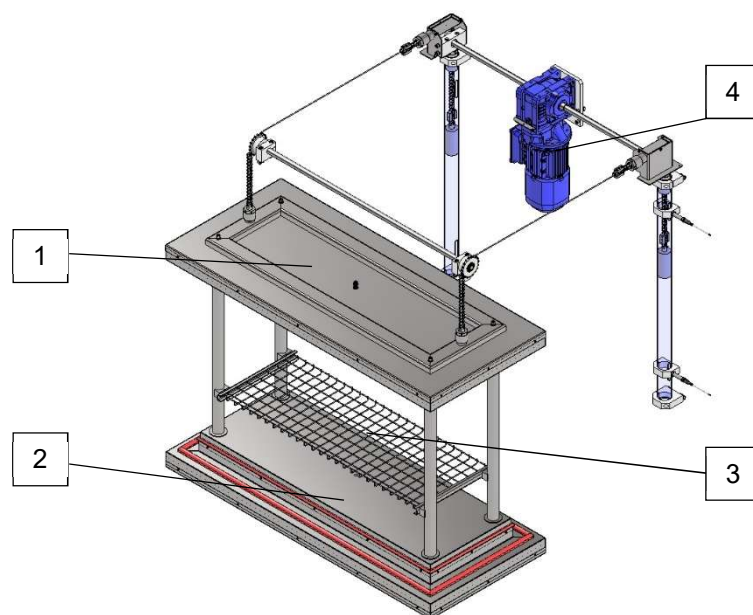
3D model of the lift: 1 – ceiling; 2 – floor; 3 – grating for test object positioning; 4 – drive system.
